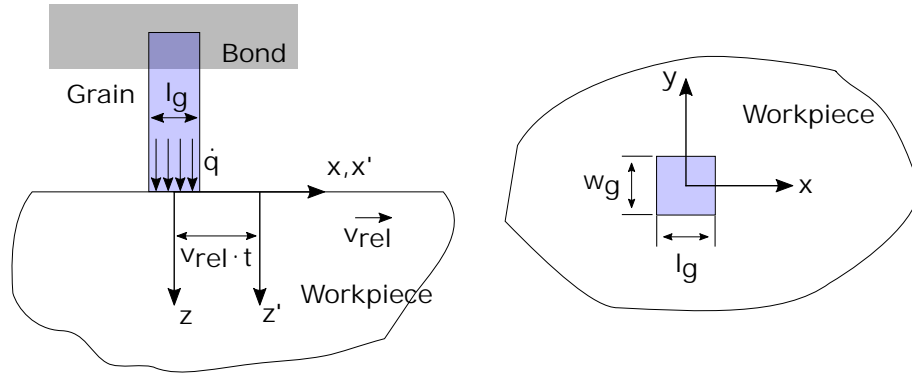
Dimensions and definitions of the grain-workpiece contact conditions.
